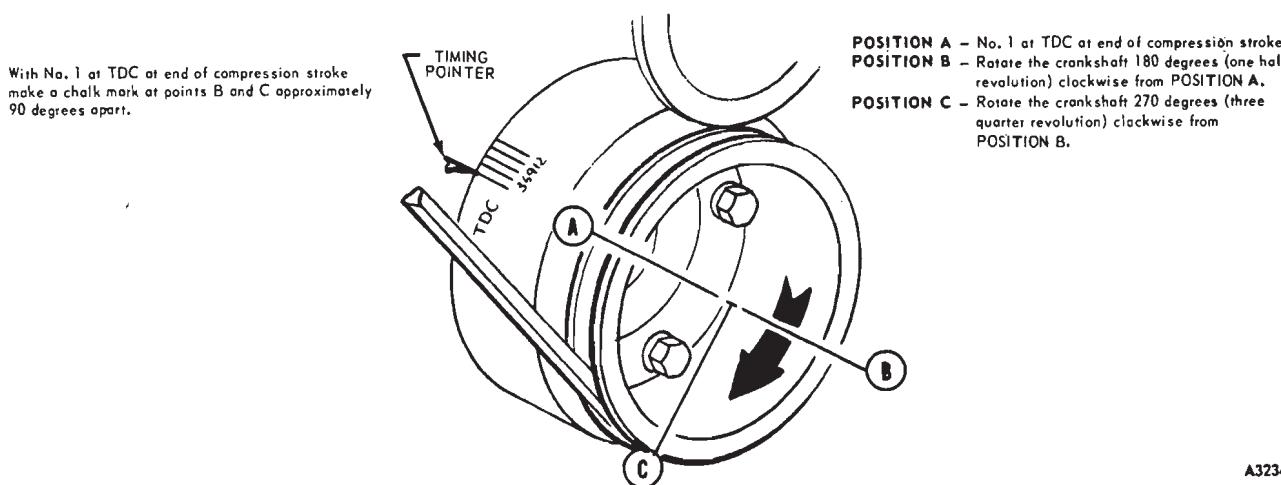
Position of Crankshaft for Adjusting Valve Lash
